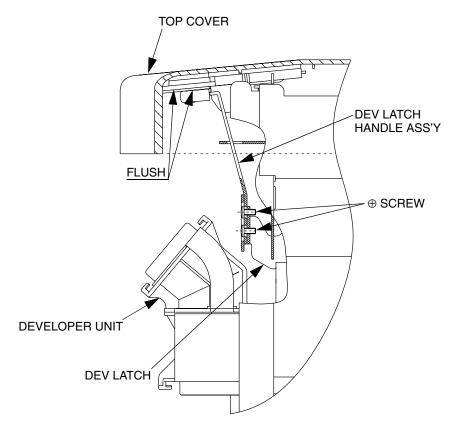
Fixation of the DEV Latch Handle Ass'y
